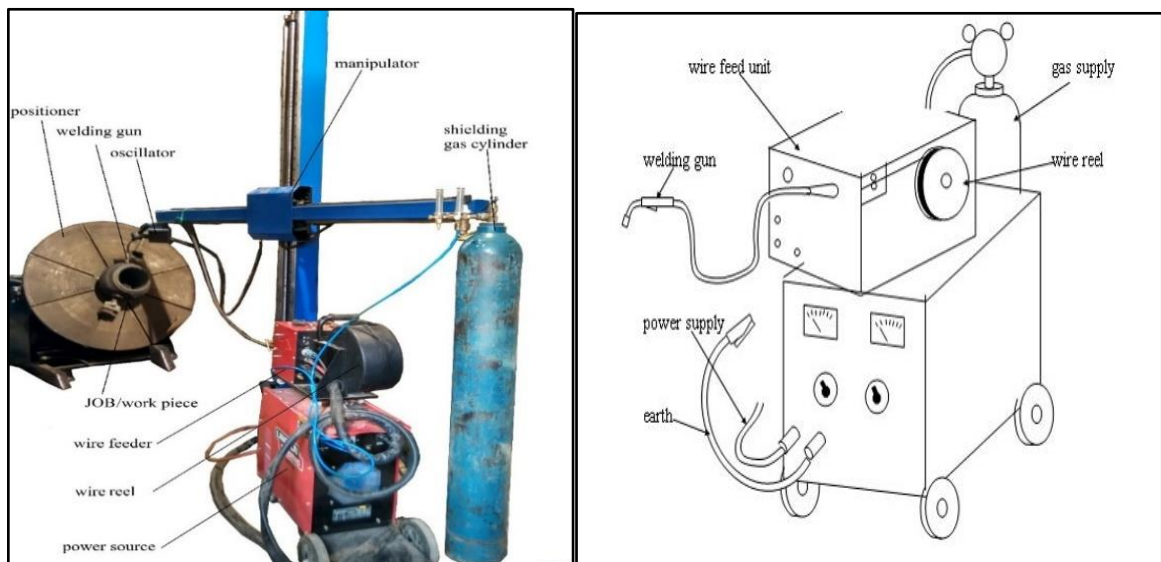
Figure of GMAW Machine (Ethan Bale, 2022)
